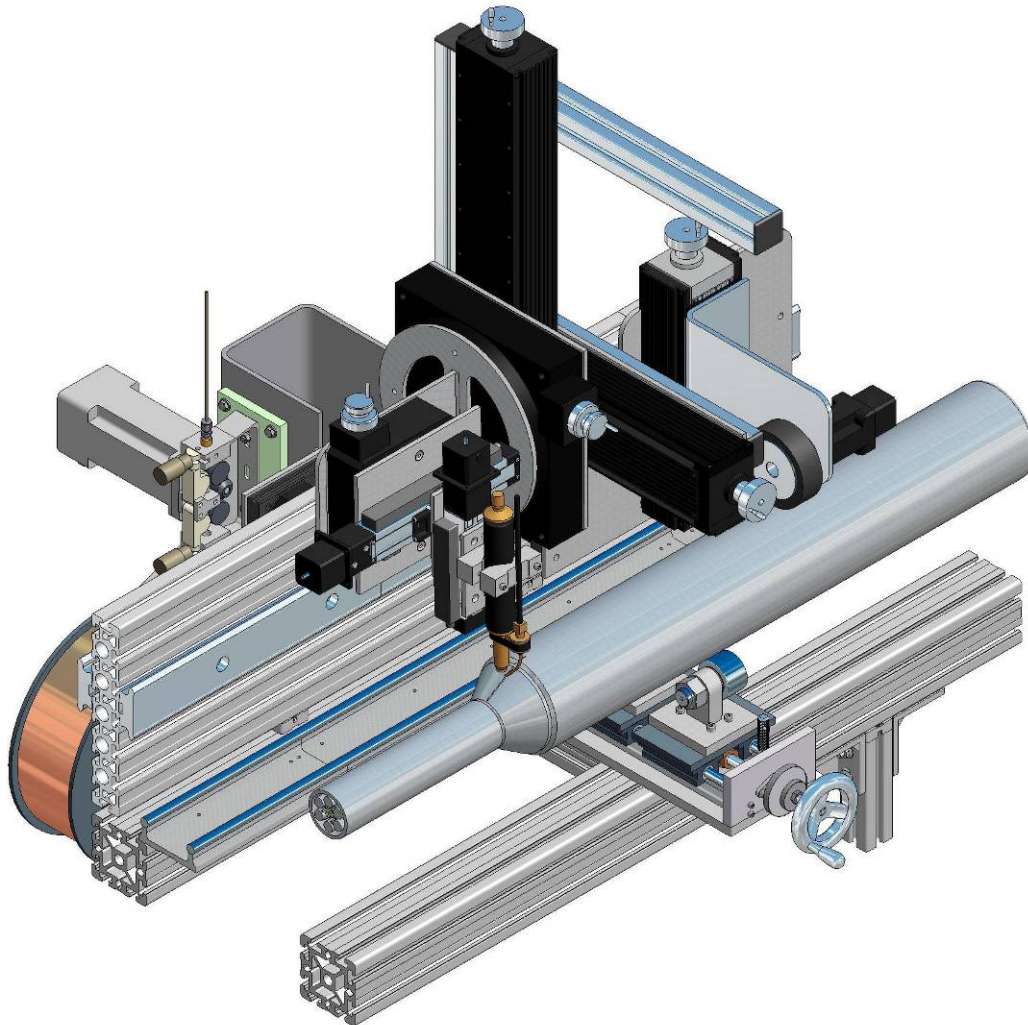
Isometric view of the weld head on the assembly bench.
